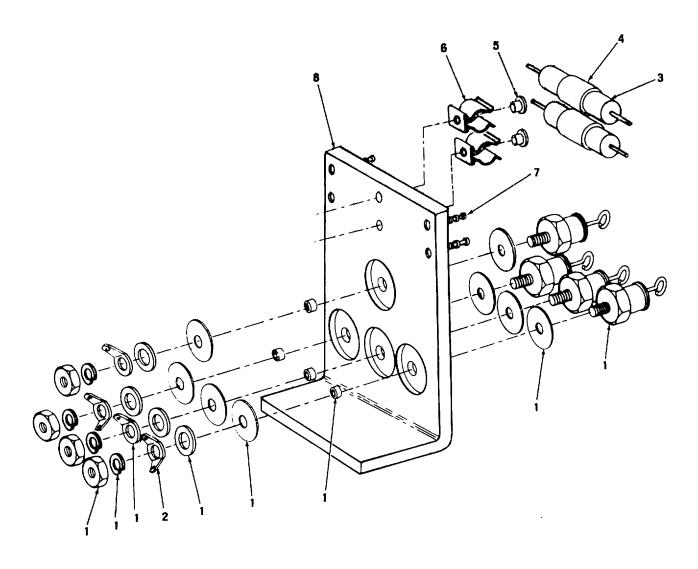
Monitor Cabinet, Type C (CY-7361) Plate Subassembly, Component Mounting
